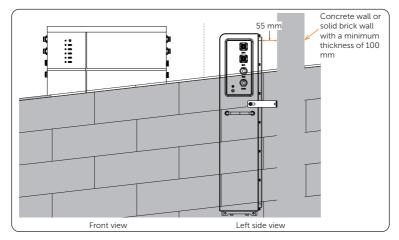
Fixing L-shaped wall bracket to the battery module
